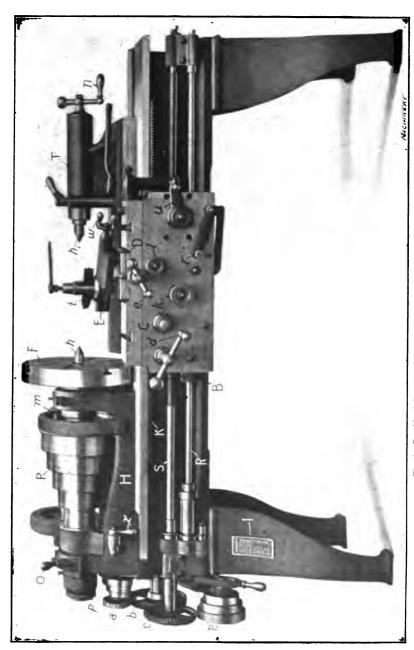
Bradford Standard Lathe-View of Front or Operating Side
